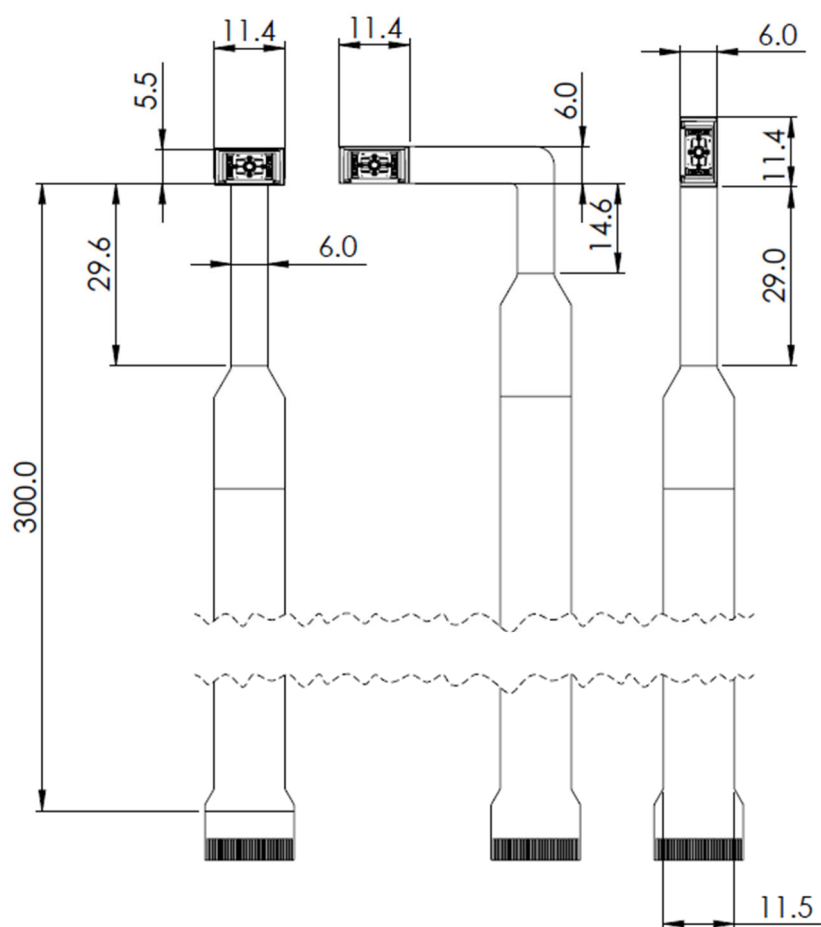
EL000350.X Mechanical Drawing (models from left to right: V, RA, and H)
